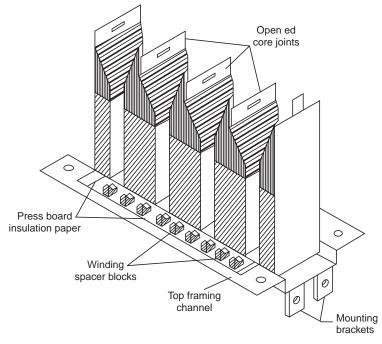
AMDT core/coil assembly (core joints open, ready for coil installation)
